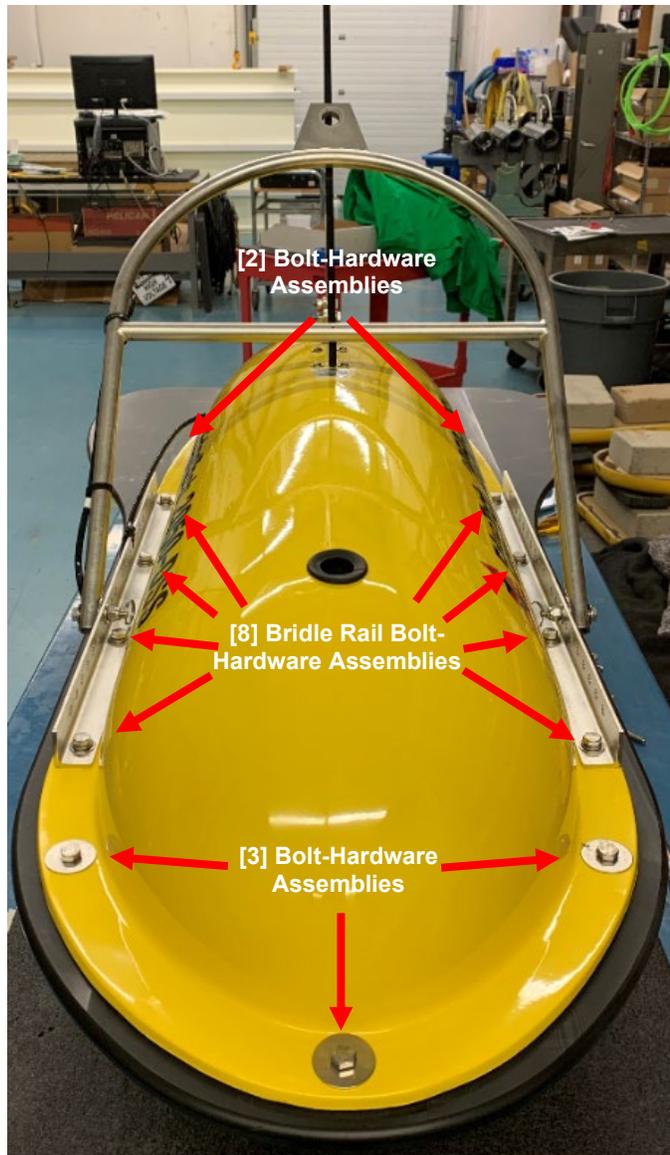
2050-DSS Upper-Shell Disassembly [13] Bolt-Hardware Locations
